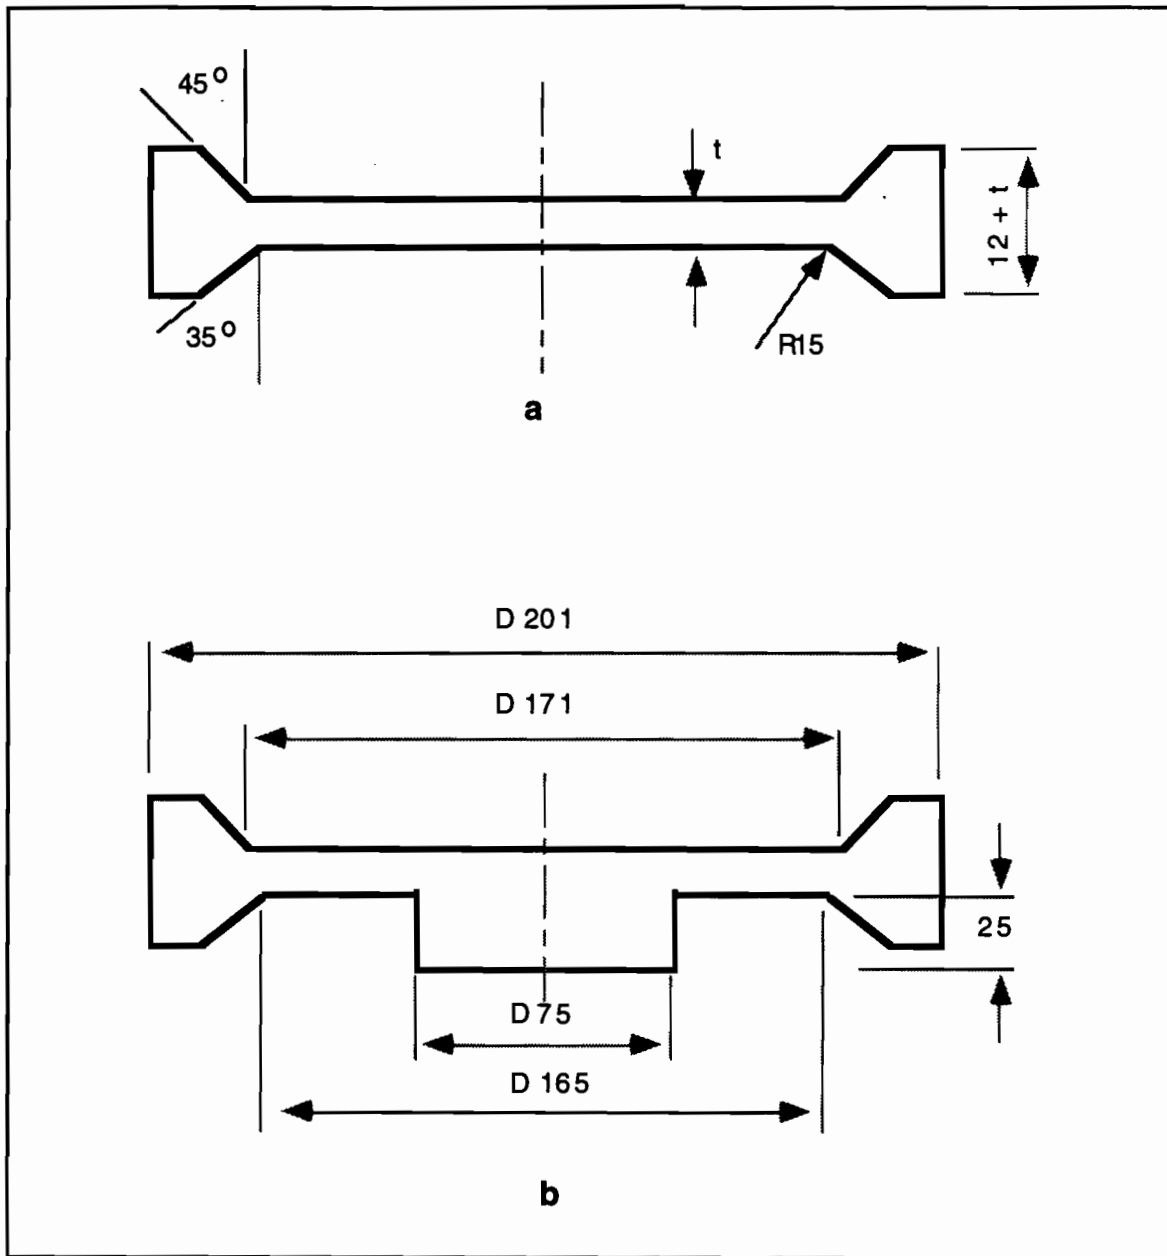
Final configuration of the disk shaped part, a) Disk 1, b) Disk 2, dimensions in mm
